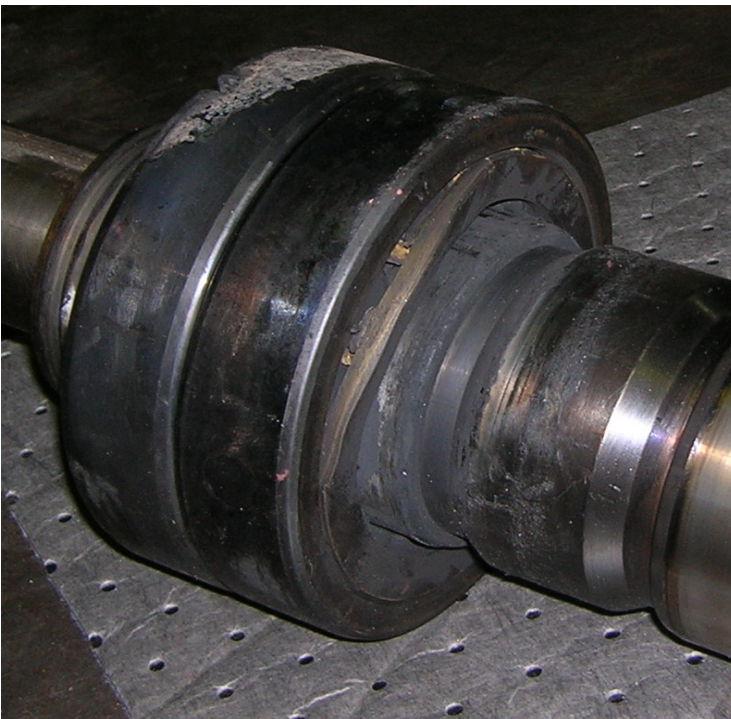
Photo of ball bearing removed during the 11/2010 failure.
